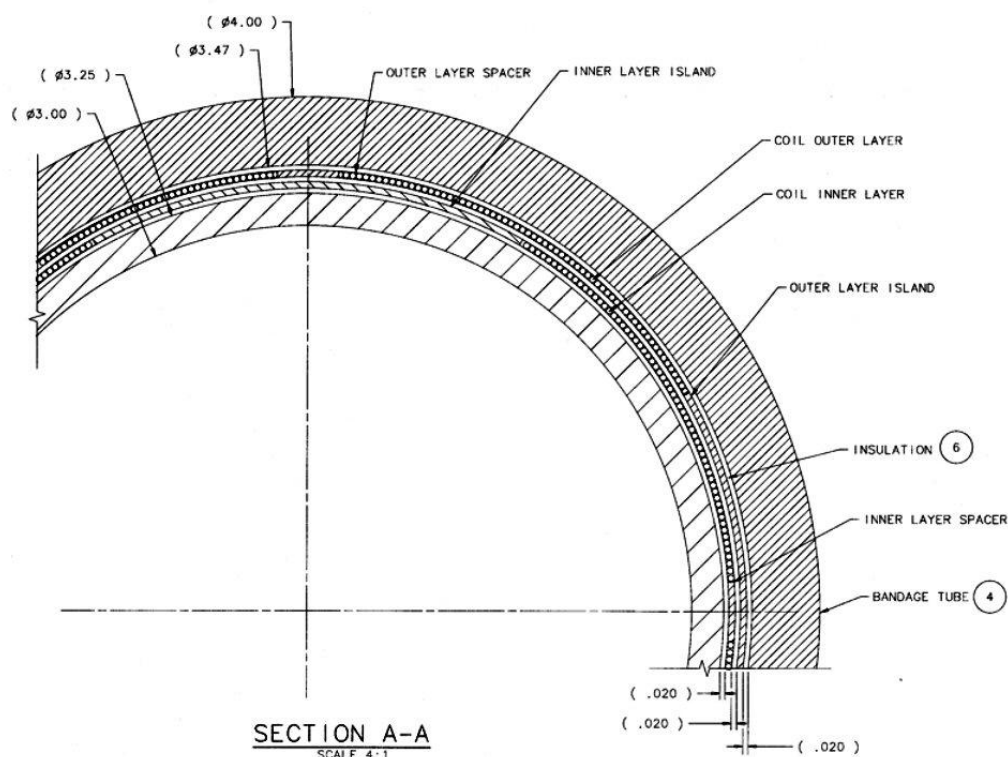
Cross section of dipole assembly; outer iron flux return cylindrical shell is not shown.
